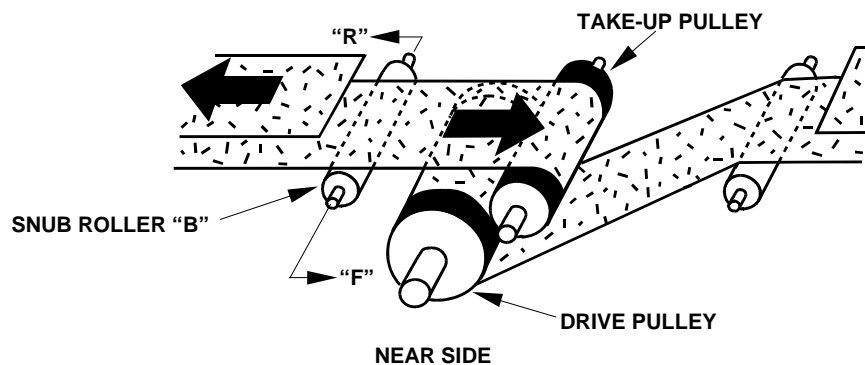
Adjusting Upper Bend Snub Rollers for Tracking Return Run of Belting.
